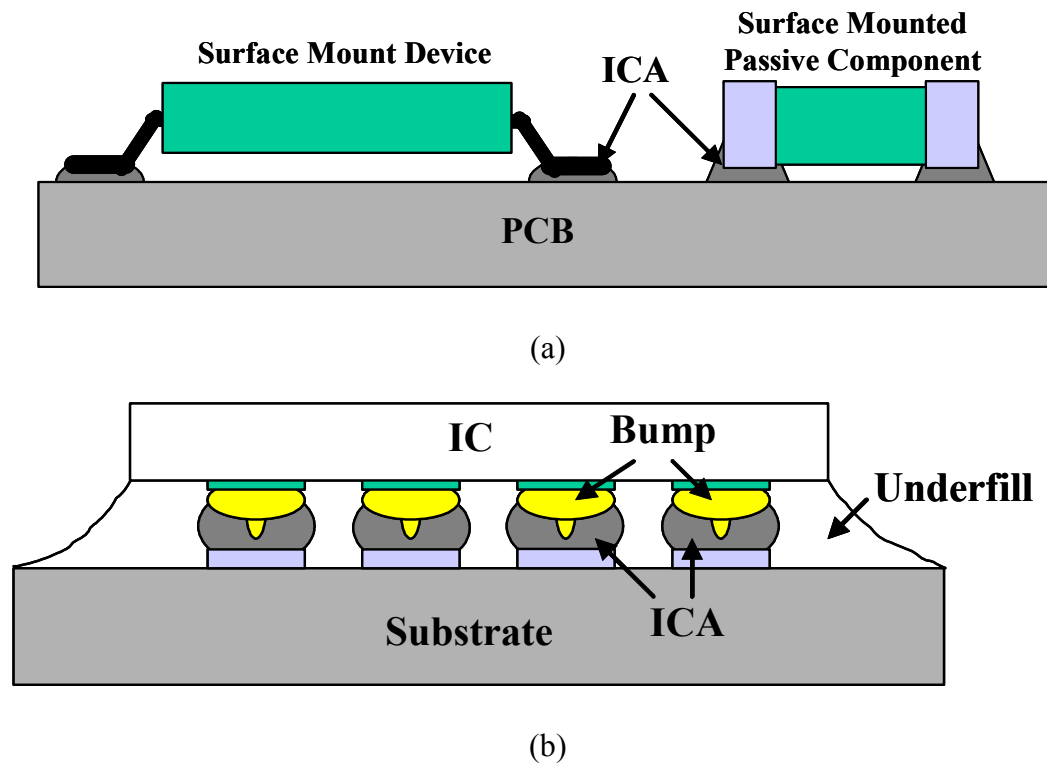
Schematic structures of (a) surface mount interconnection using ICA, and (b) flip chip interconnection using ICA.
